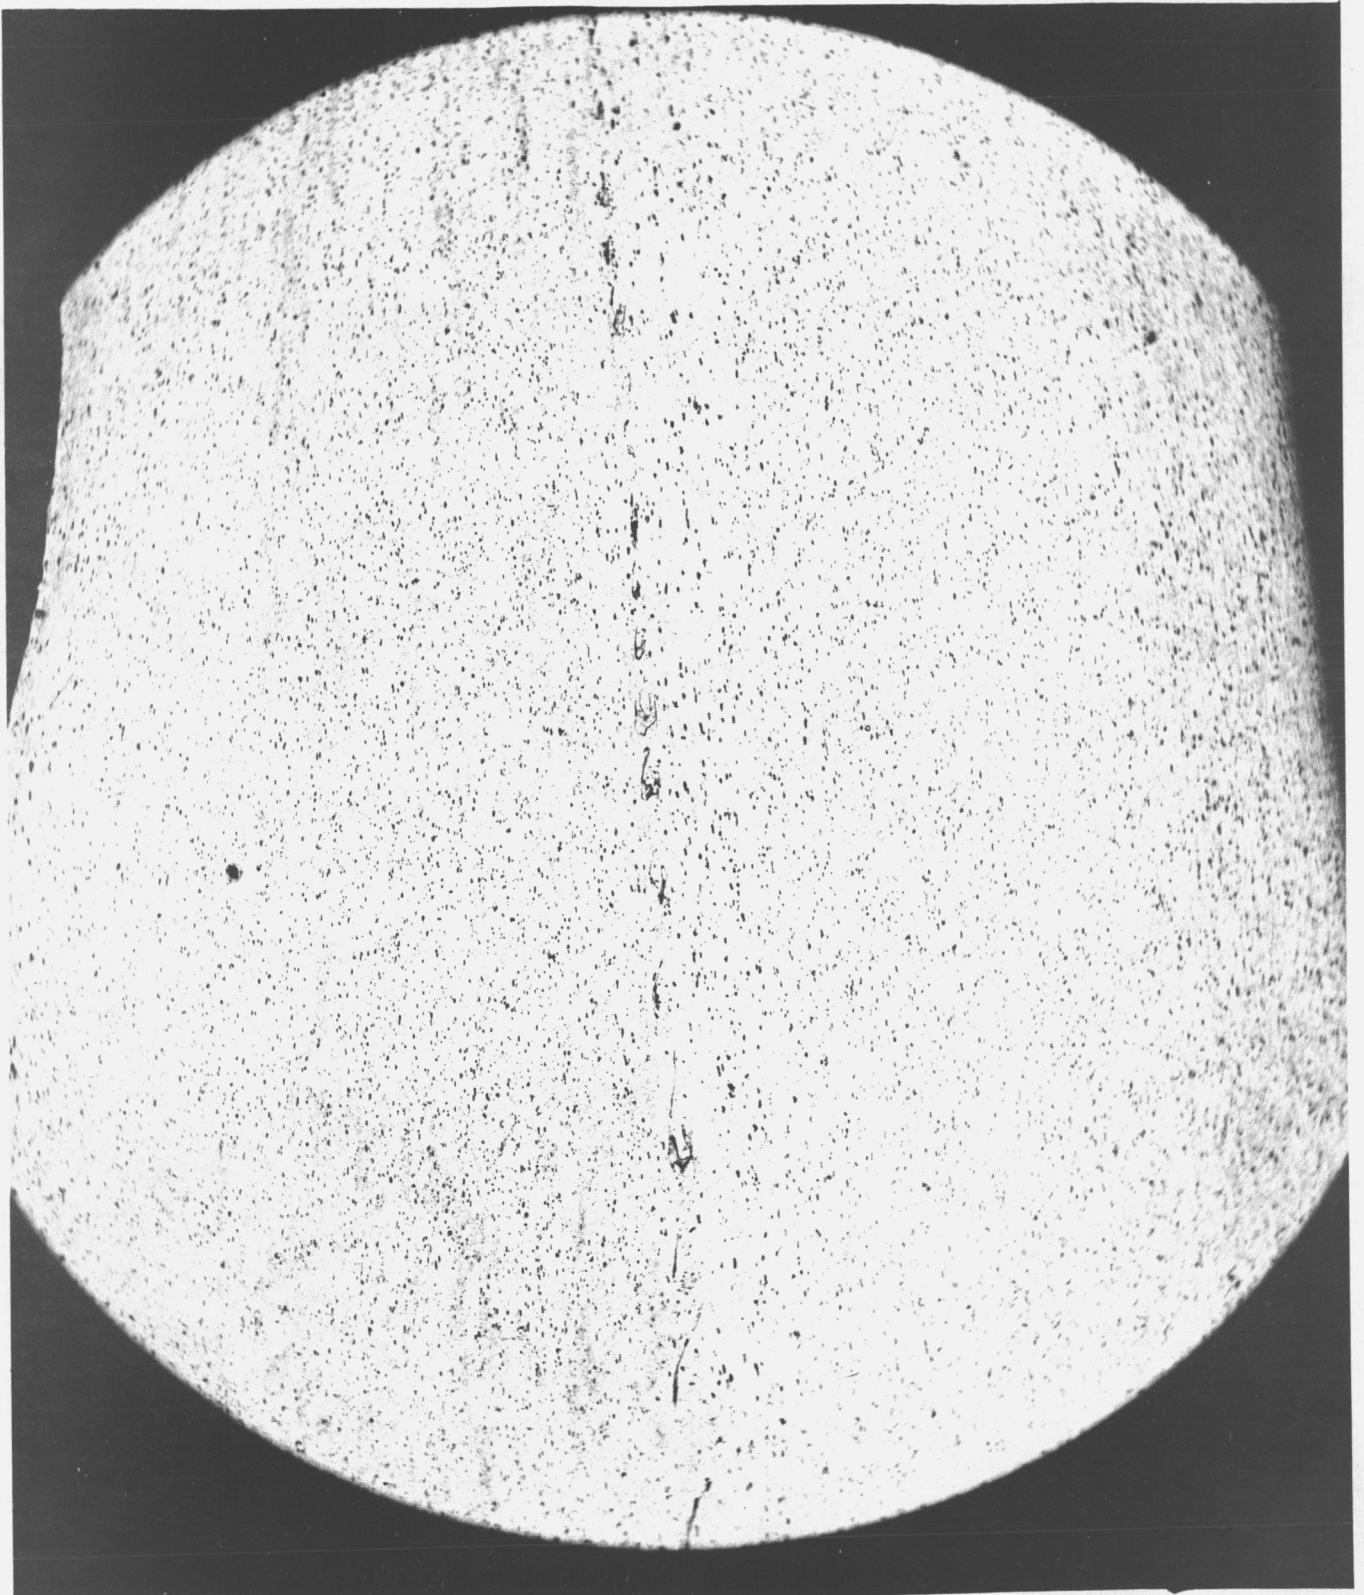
Sample of Explosive Welding Performed with a Straight Sleeve Joint by Detonating a Layer of Bulk Material.
